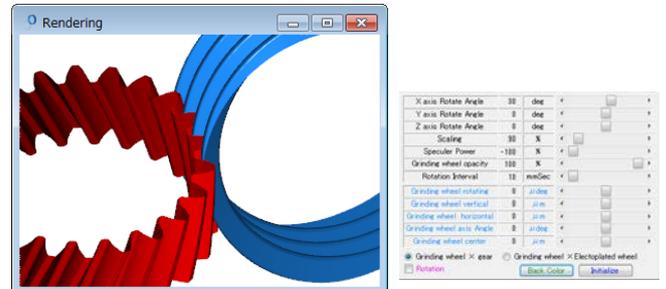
Tooth profile rendering (gear and threaded grinding stone)
